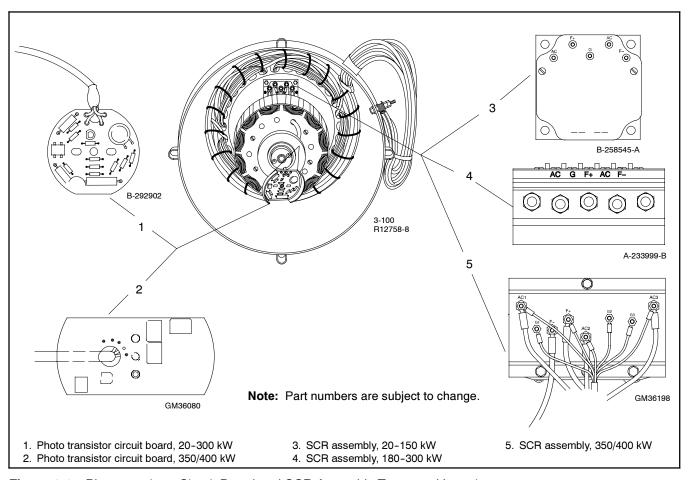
Phototransistor Circuit Board and SCR Assembly Types and Locations
